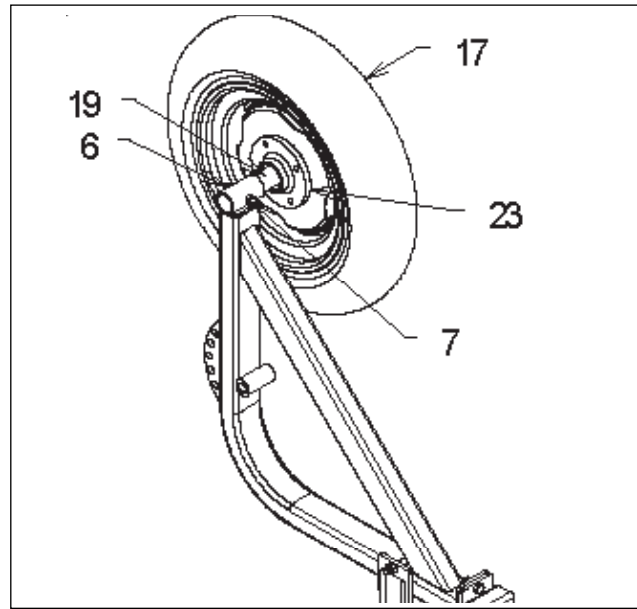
Frame with Wheel FRAME&WHEEL.CAD
